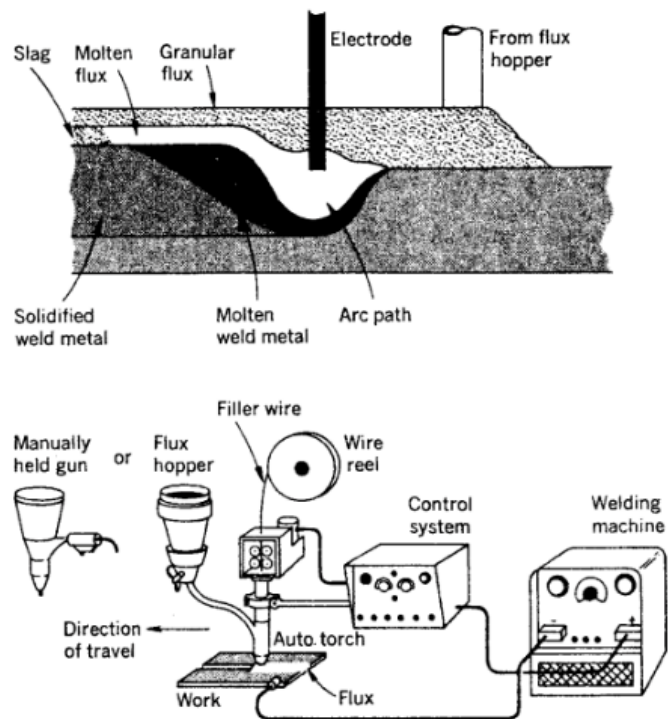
Submerged-Arc Welding, SAW [26]
